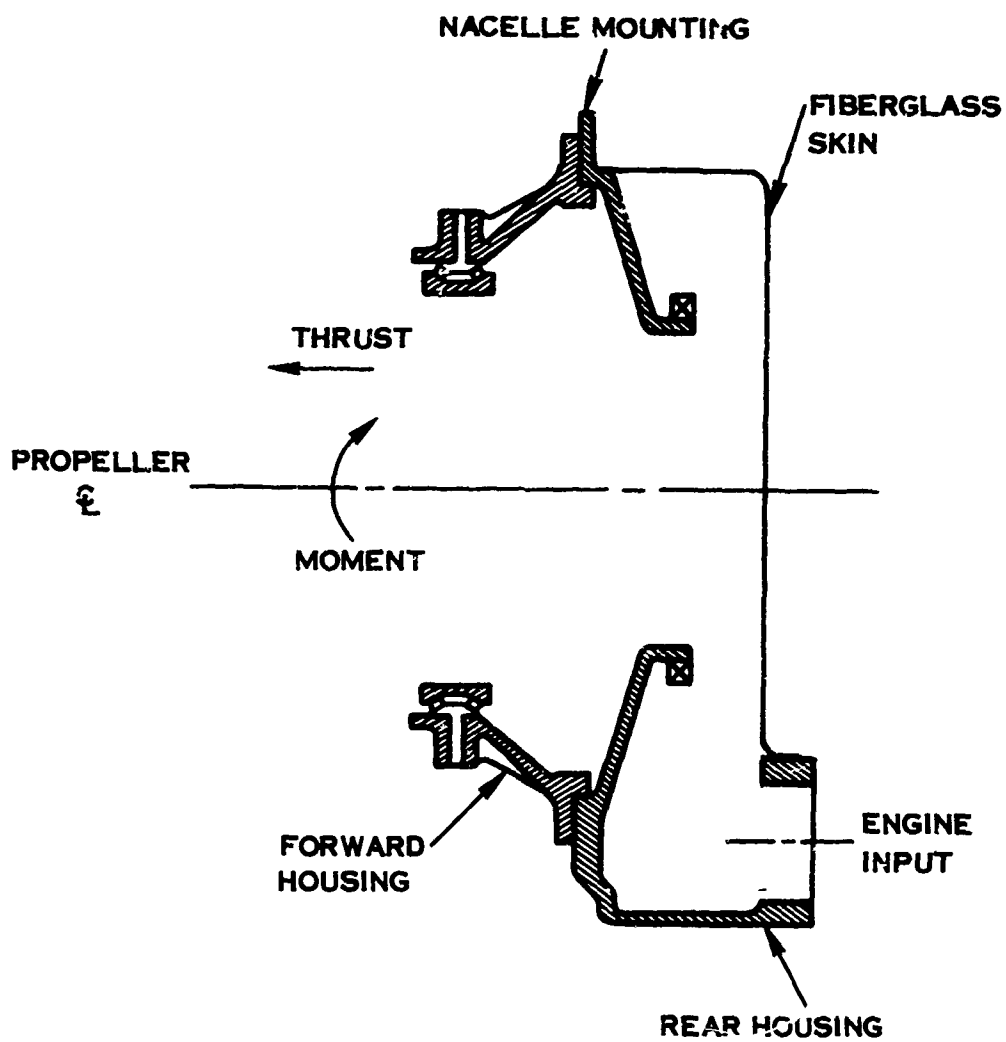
BACK-TO-BACK CONE HOUSING CONCEPT
